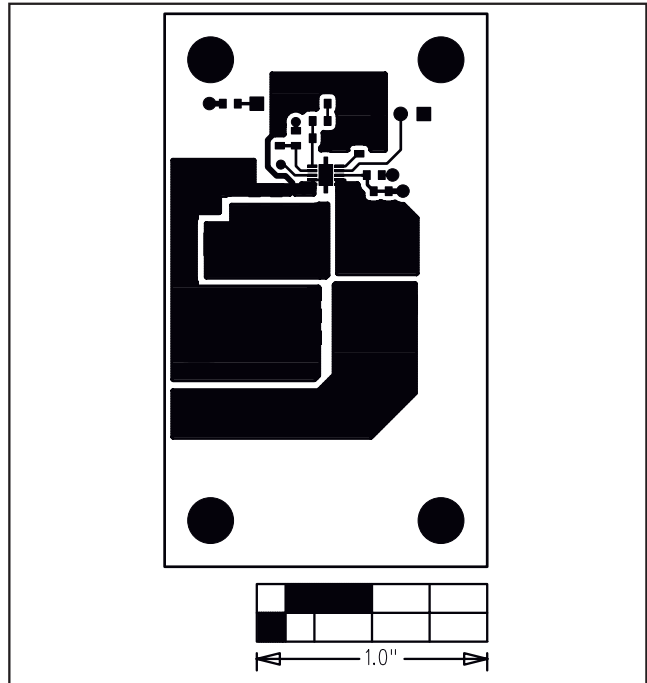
MAX8727 EV Kit PC Board Layout—Component Side
